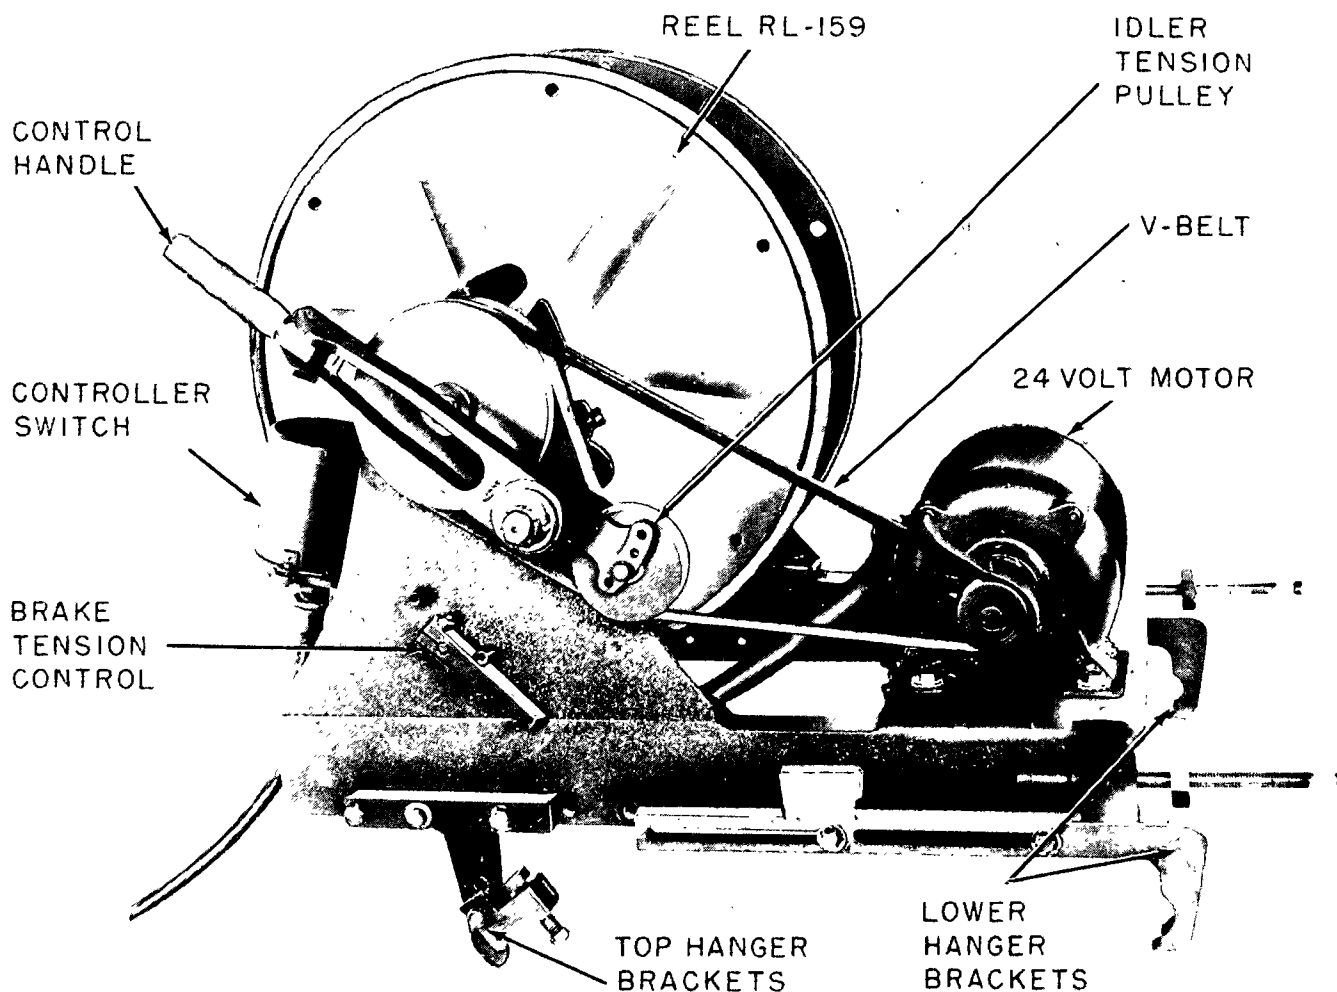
Cable Reeling Machine, Motor-Driven, RL-172/G.
